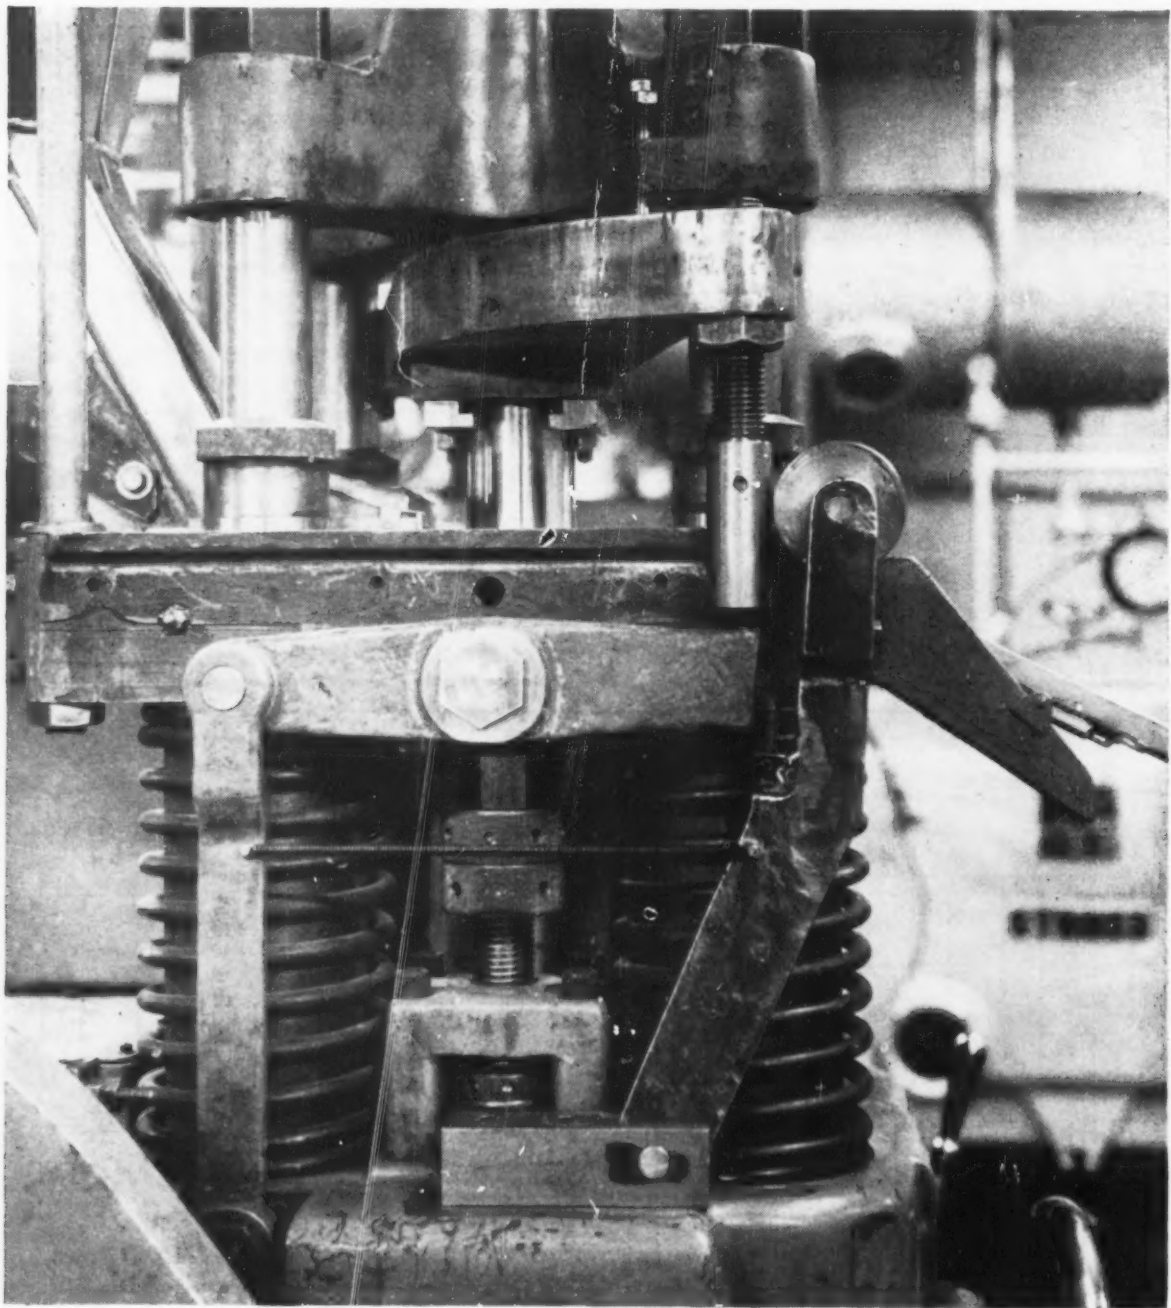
Close-up of floating die table which provides equal pressure from top and bottom of a piece.
